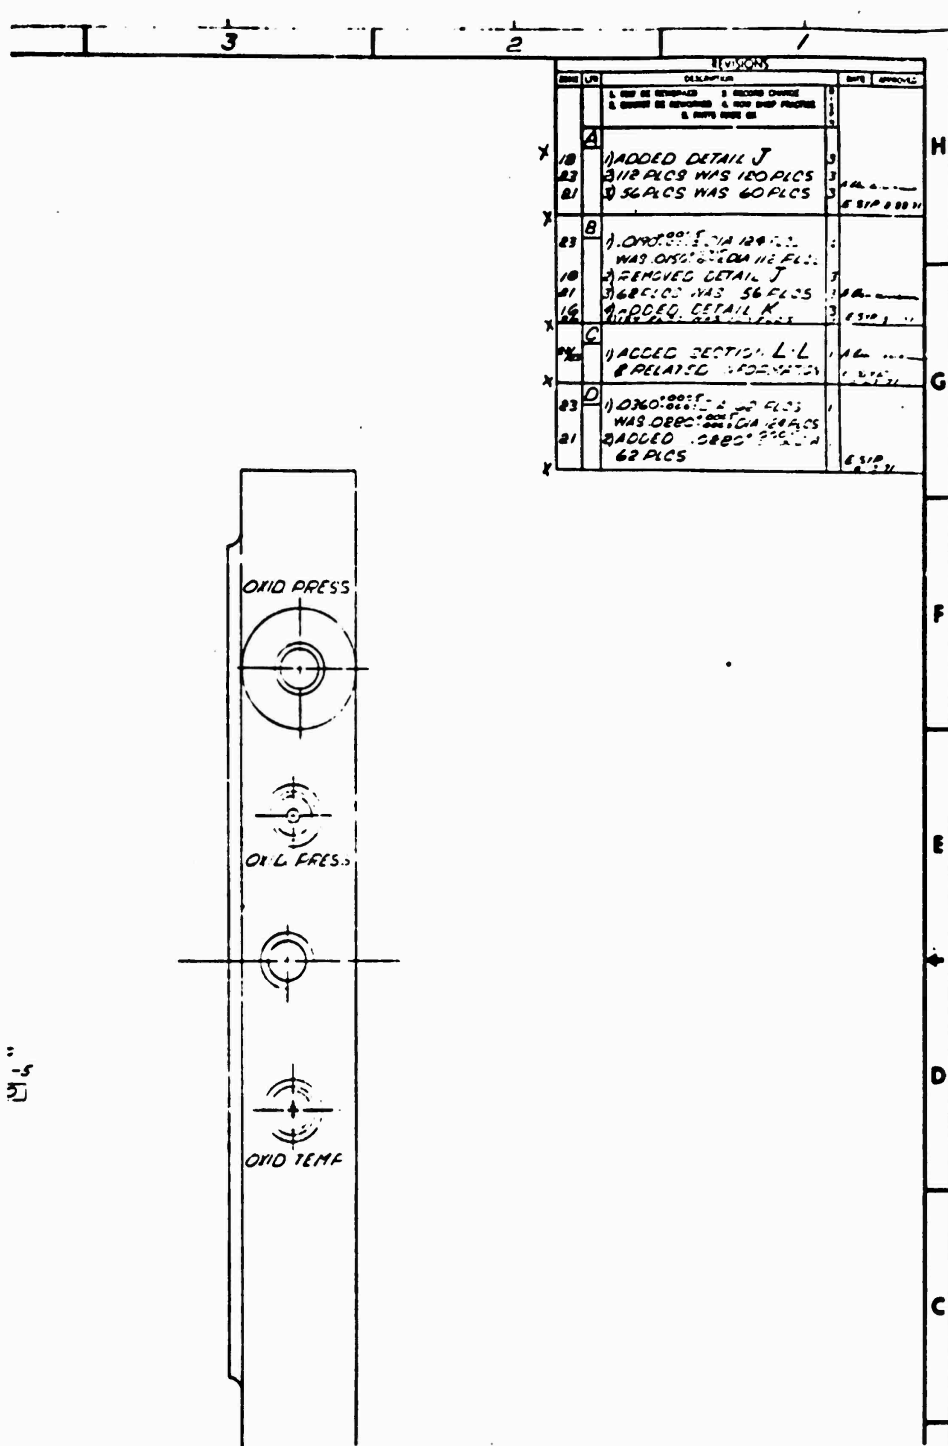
Single-Panel Injector, Unit 4 Coplanar, Body Assembly
